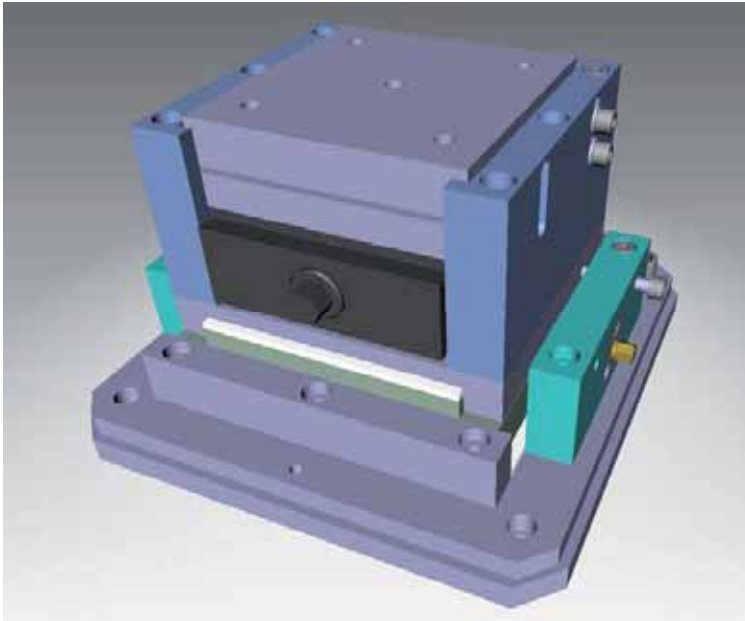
The girder jack with a standard wedge located in a positioning system.
